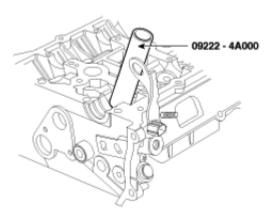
Pushing Oil Seal Using SST (09222-4A000) Courtesy of HYUNDAI MOTOR CO.
